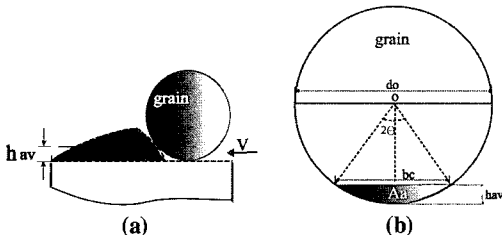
(a) Side section view of undeformed chip thickness, (b) cross section view of abrasive grain in grinding direction
